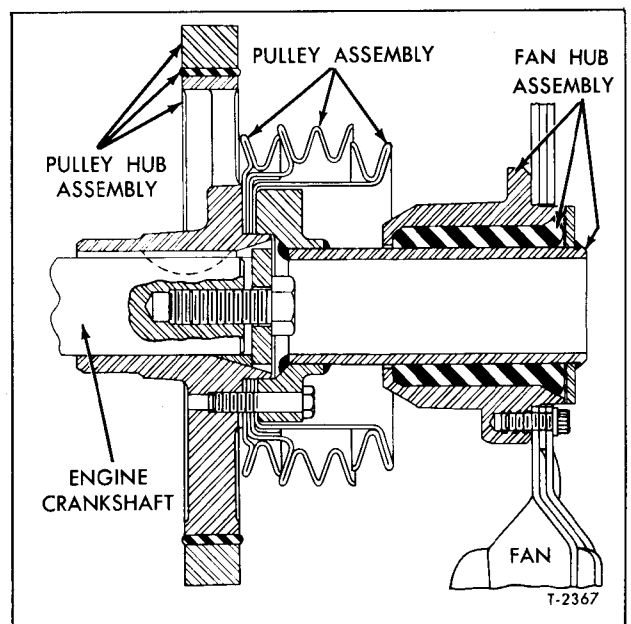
Fan Drive Hub Assembly (Typical For V6 Gasoline Engines in Tilt Cab Models)
